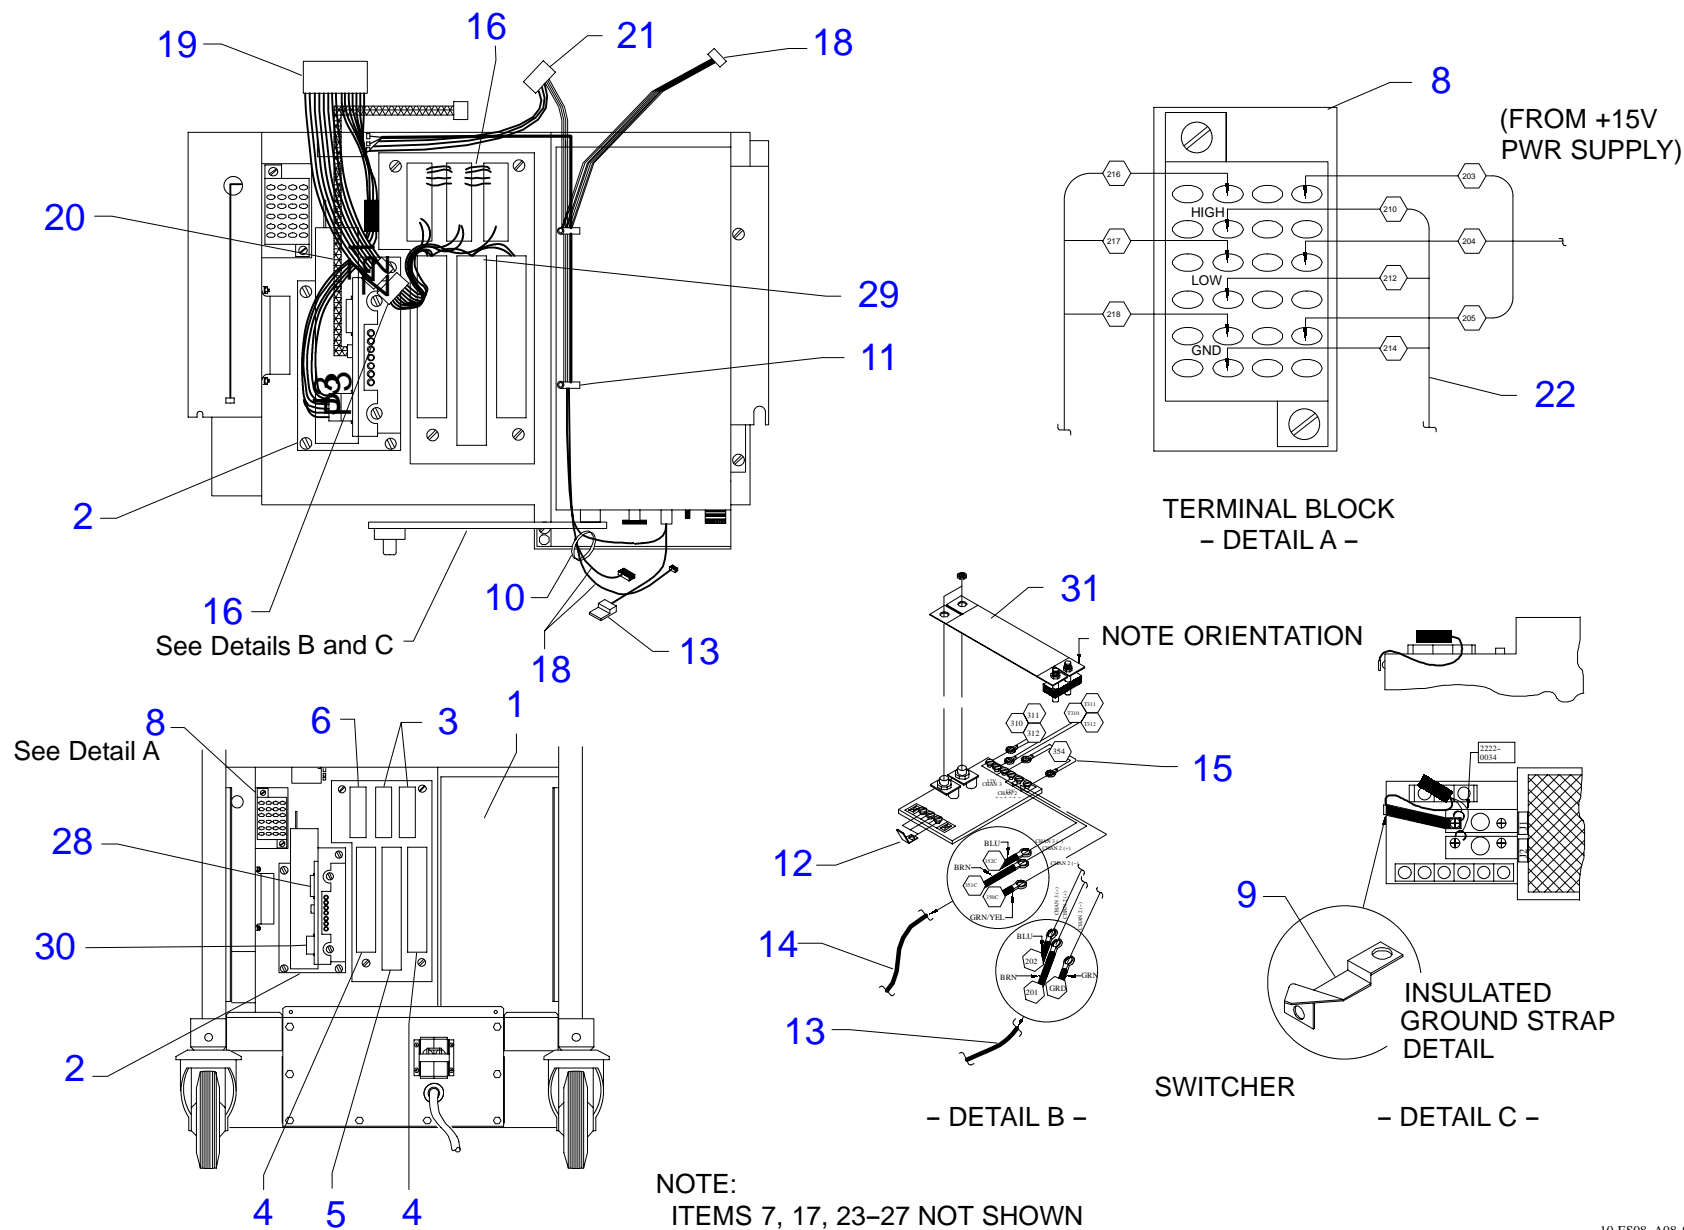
Card Cage Assembly with PCBs (Sheet 1 of 2)
